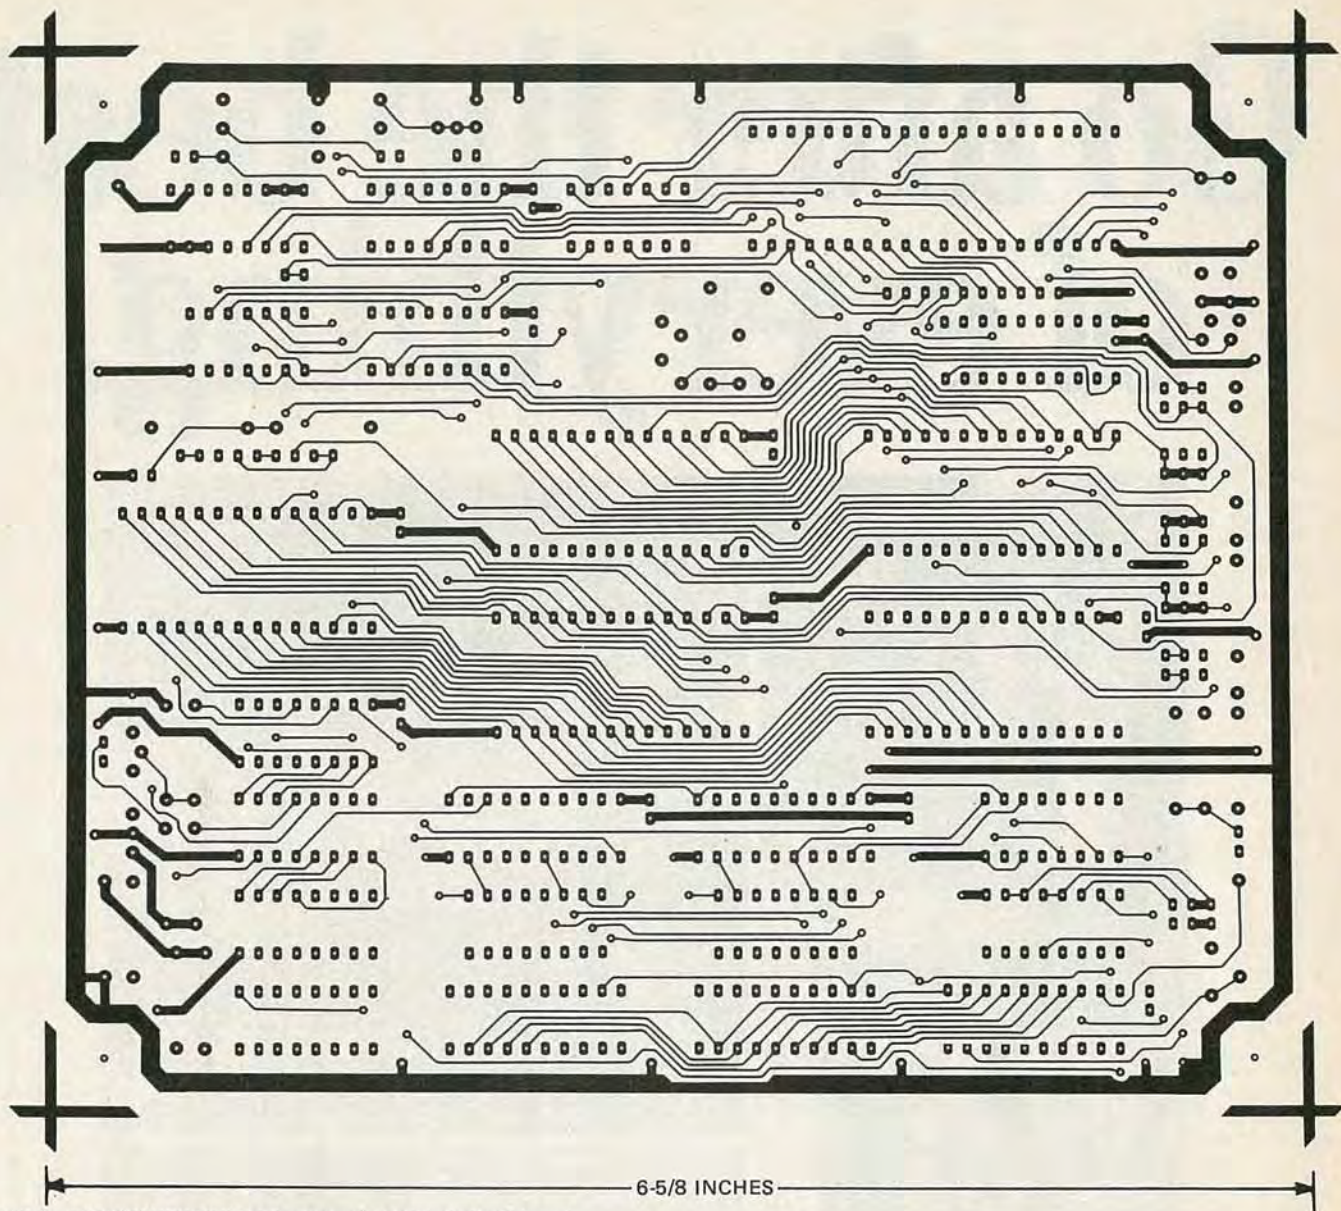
THE SOLDER SIDE of the computer printed-circuit board.
